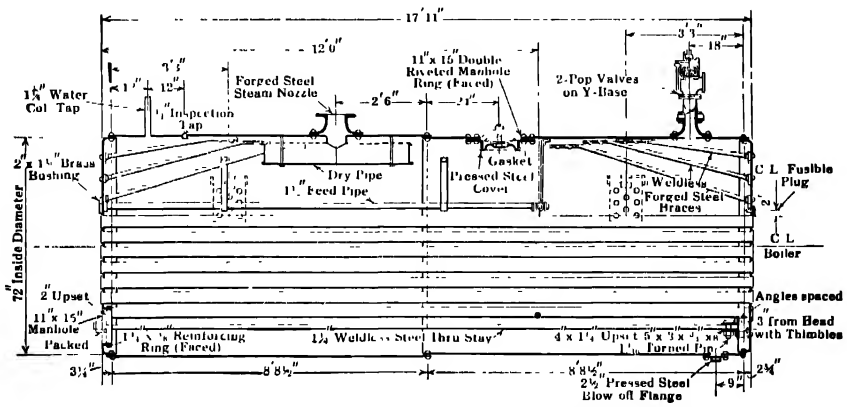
Longitudinal Section through a 150 Hp. Horizontal Return-tubular Boiler.
